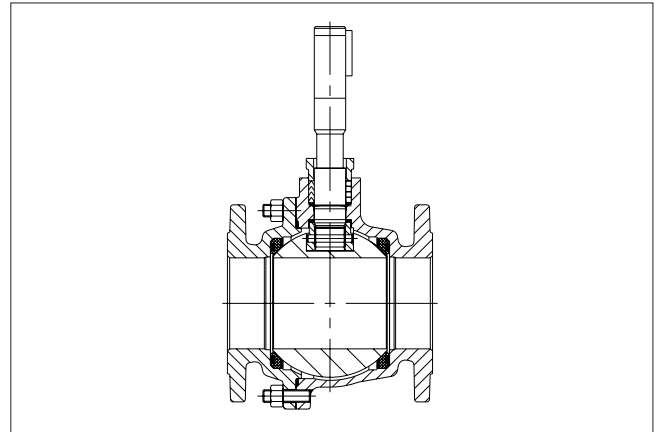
Construction, sizes DN 50/1" to DN 200/8", seat supported ball
